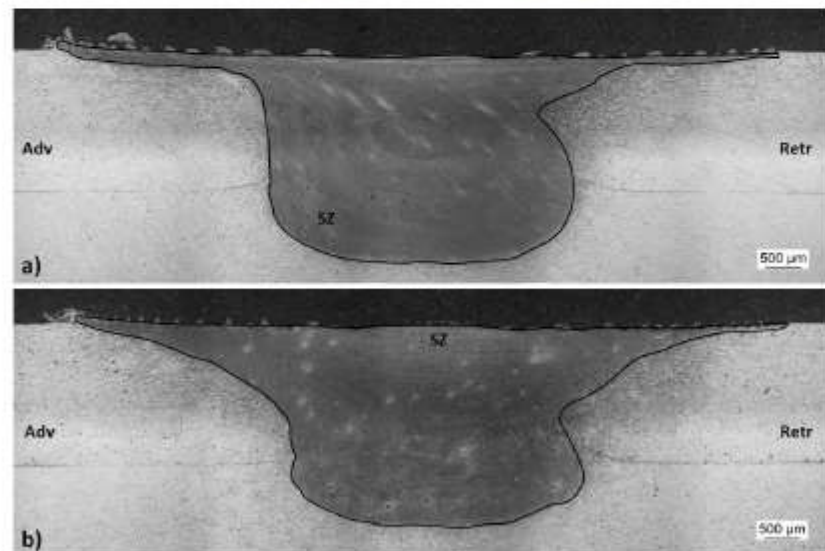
Cross-sections of FSW lap joints produced at 800 rpm and 254 mm/min (0,32 mm/rev) with a) conventional threaded tool and b) tool with 3 flats
